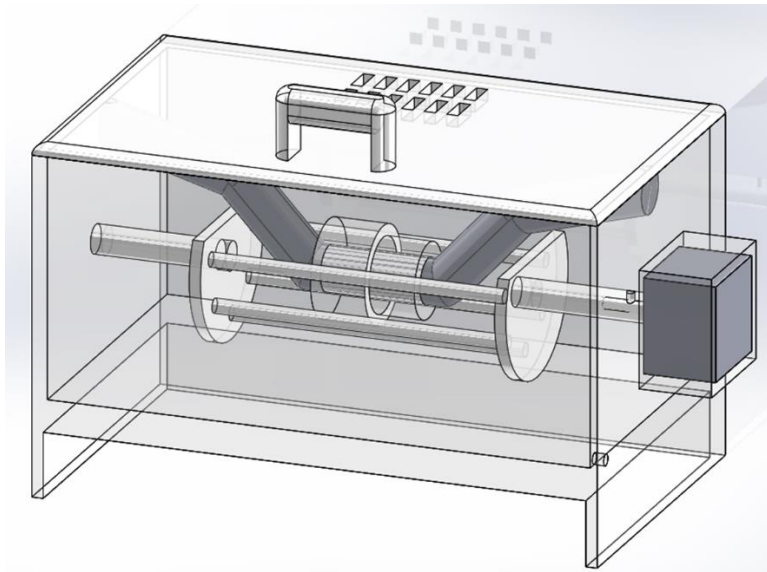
Solidworks of final design: Final design showing rotatable cage with larynx and tubes displayed.
